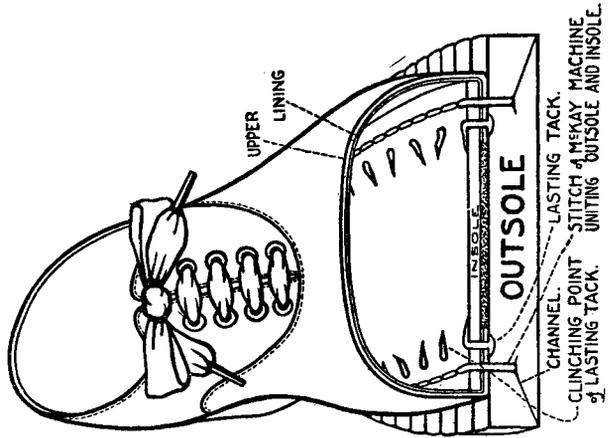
CROSS SECTION OF A McKay MACHINE SEWED SHOE.
